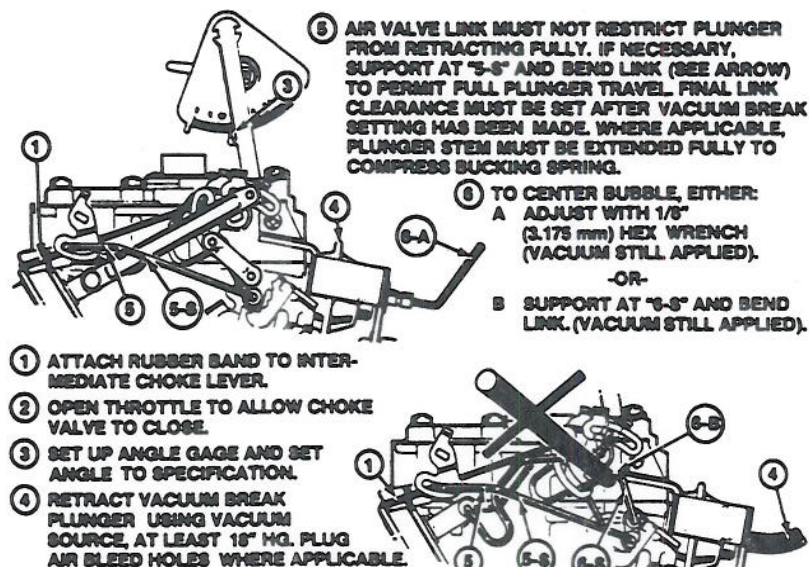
Primary vacuum break adjustment w/dual break units. 1983-86 E2SE carburetor
